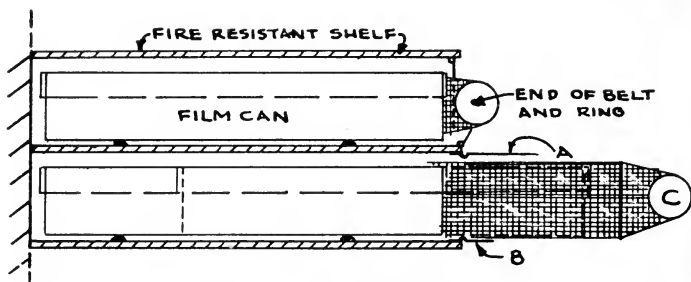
Side-view elevation. *A*, upper baffle in open position; *B*, lower baffle open; *C*, ring and retractor belt partially withdrawn.
